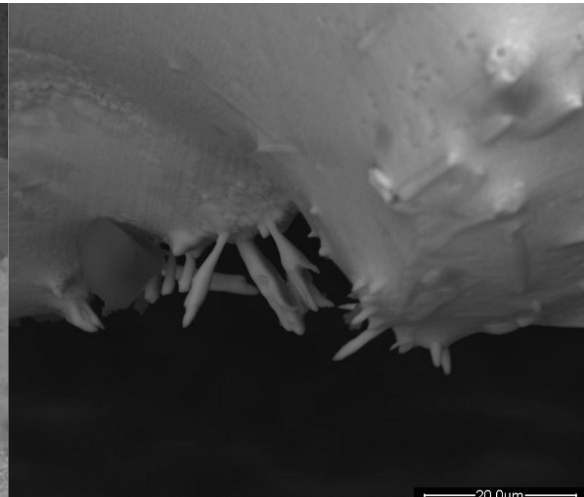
Examples of soldering icicles produced during automated soldering of Sn-3.0Ag-0.5Cu solder
